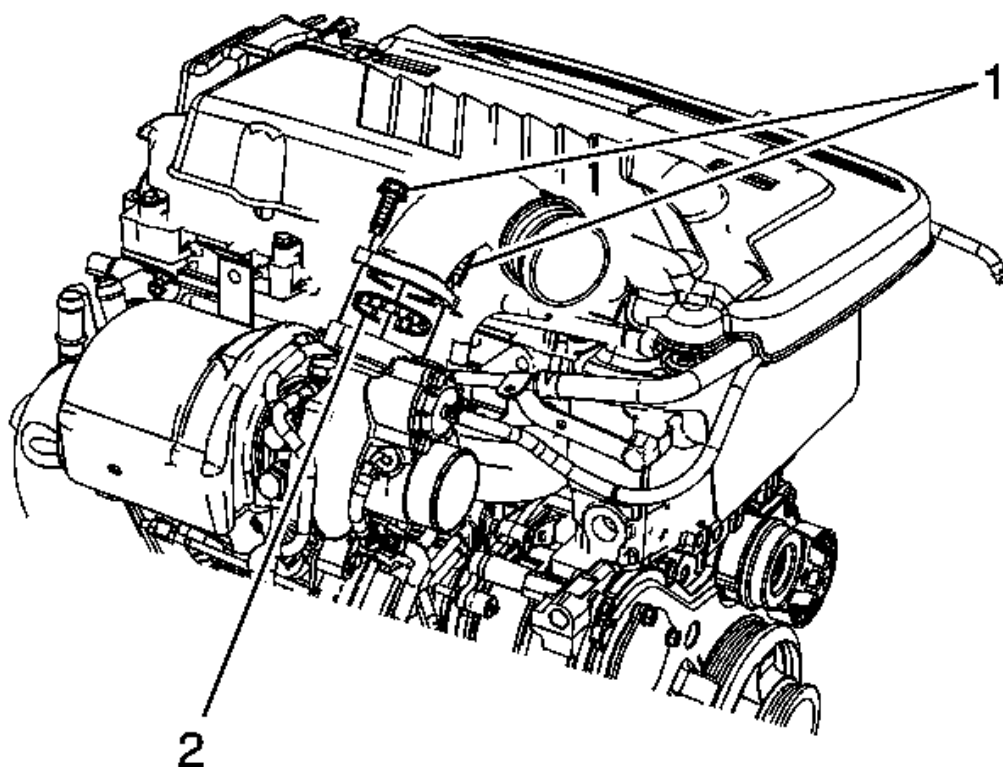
Identifying Charge Air Cooler Pipe & Gasket
